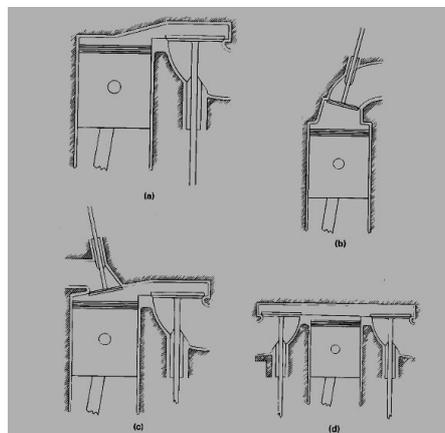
Four-stroke engine classification based on valve location (a) Valve in block, L head (b) Valve in head, I head (c) One valve in head and one valve in block, F head. (d) Valve in block on opposite sides of cylinder, T head.
